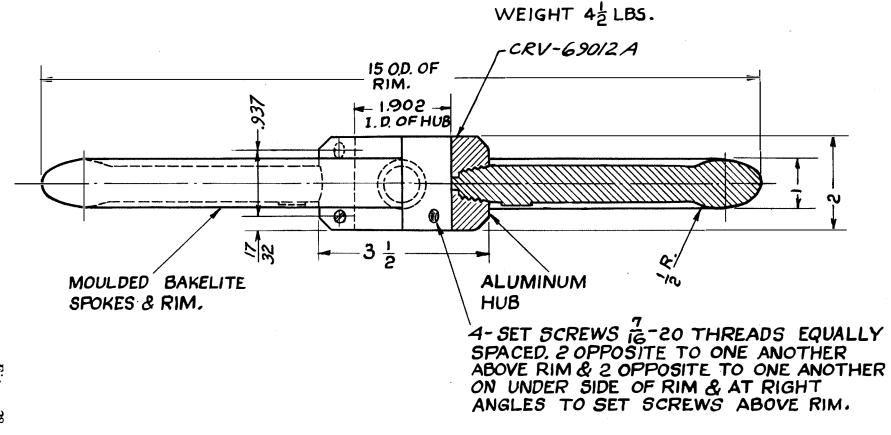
Handwheel (Outline Dimensions K-866351—Sub 1)
